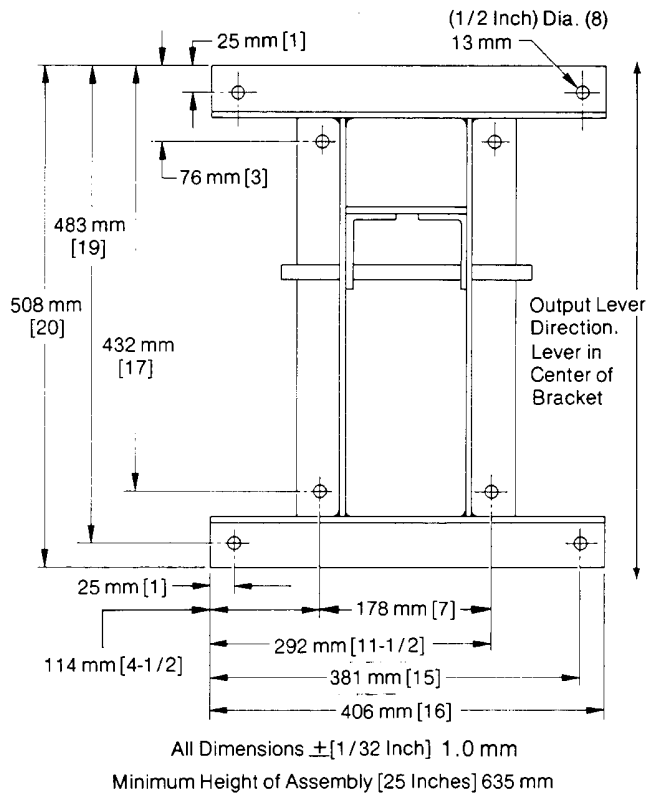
Floor Mounting Bracket Bolt Hole Dimensions.
